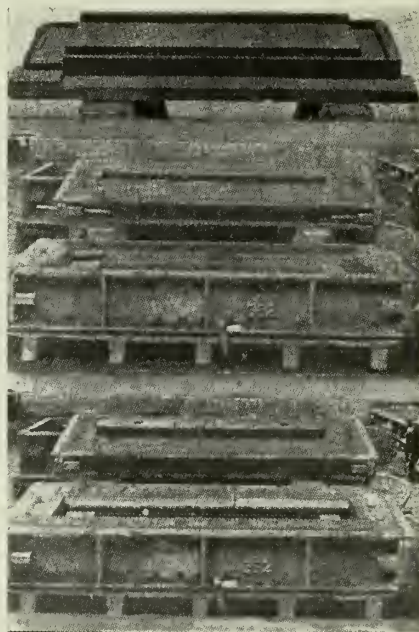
PATTERN OF MILLING MACHINE TABLE.
